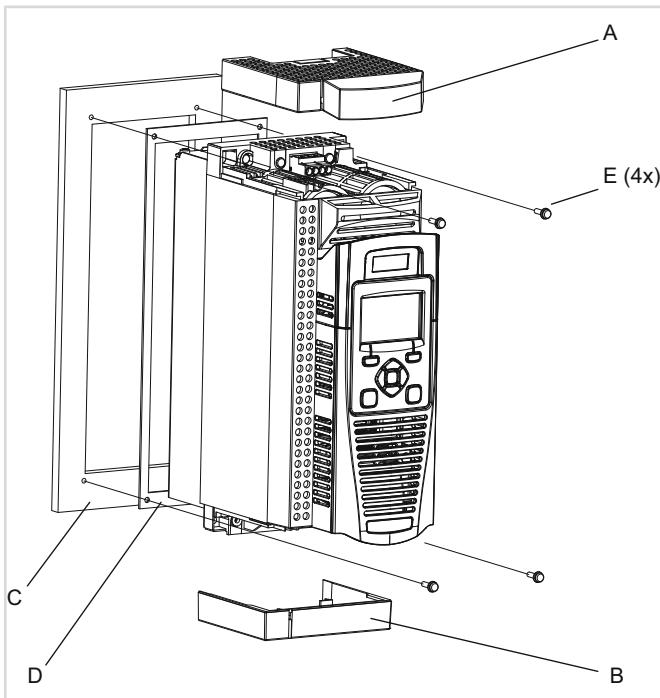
Detailed view of the through-switch cabinet mounting (example FDU)
